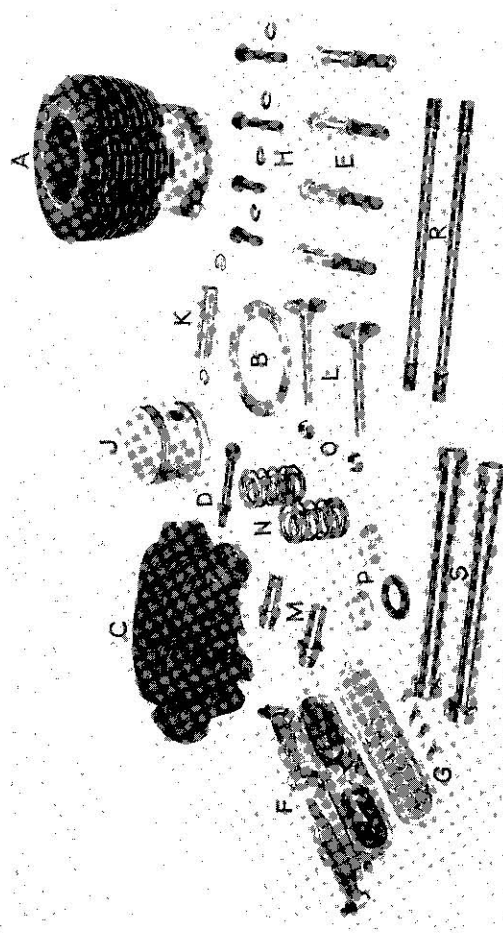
COMPONENT PARTS OF A.J.S. OVERHEAD VALVE MECHANISM
